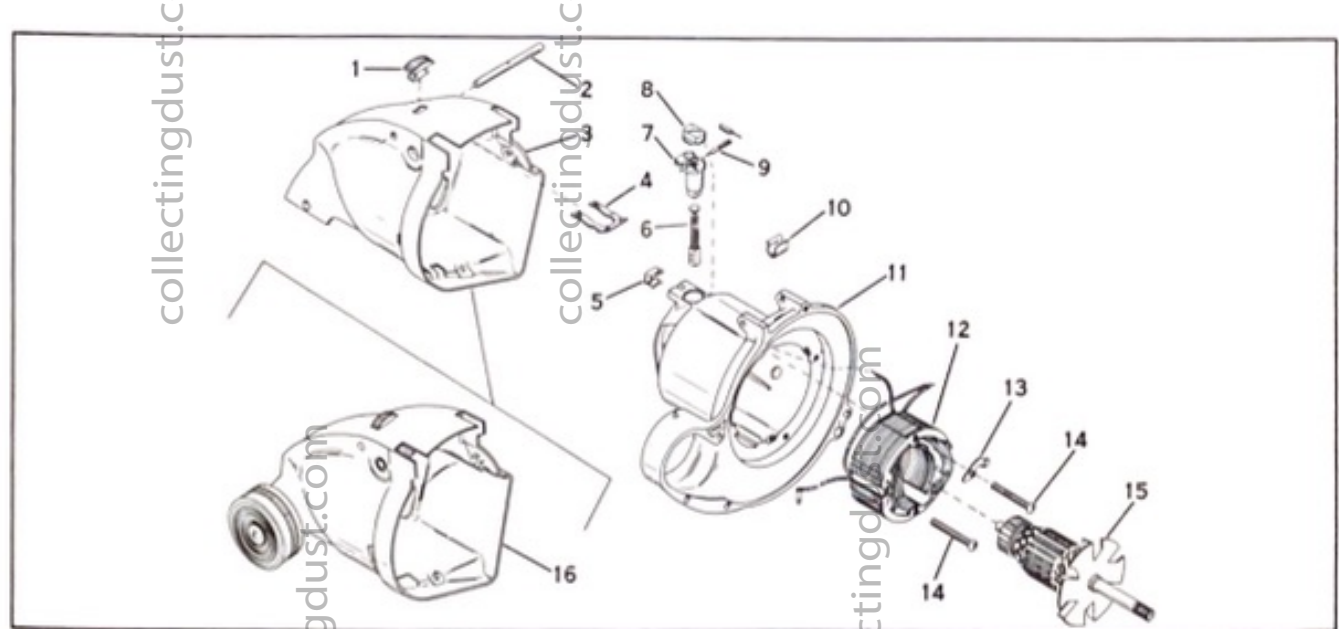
Motor group parts which are peculiar to models 519 through 560.
